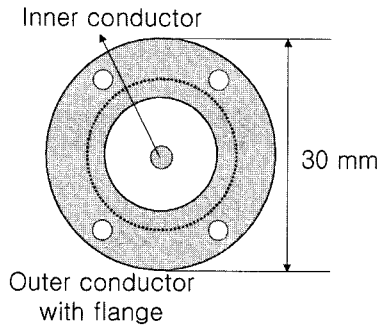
Structure and dimensions of the flanged coaxial line holder.
